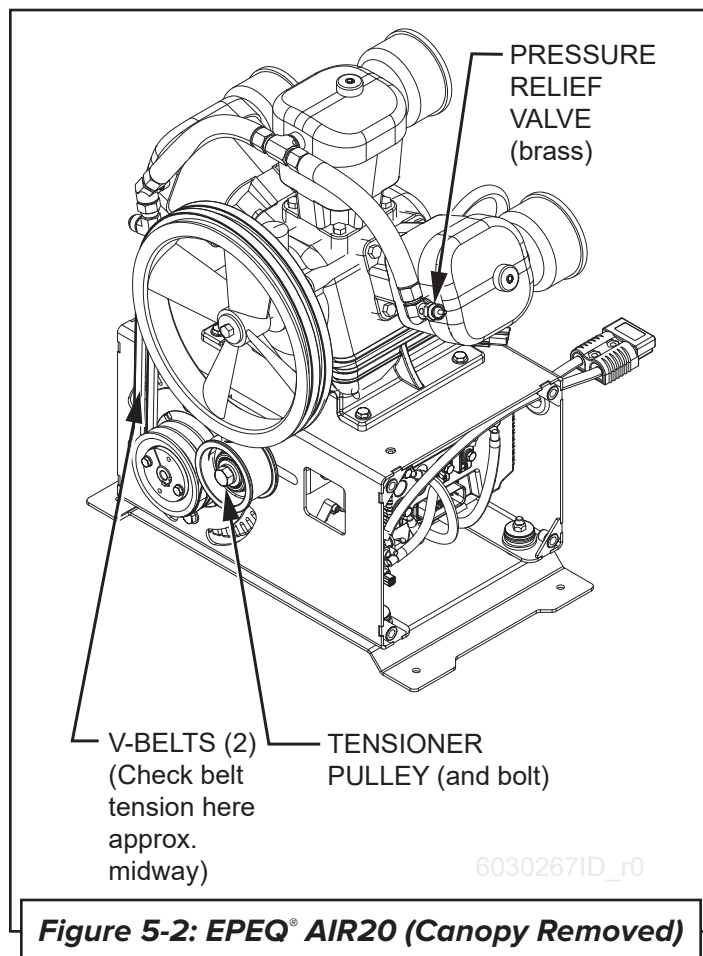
EPEQ® AIR20 (Canopy Removed)
